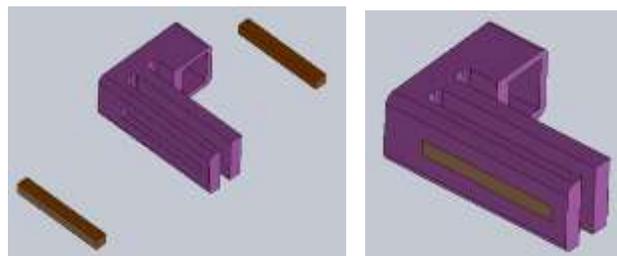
Exploded and combined schematic figure of magnets and a pair of magnet structure
